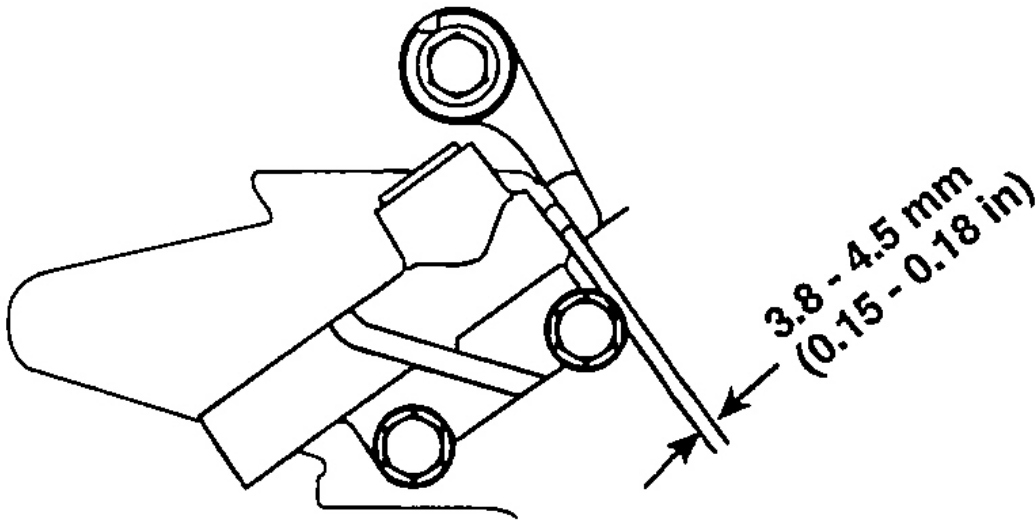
Install Auto Tensioner Set Pin & Tensioner To Oil Pump Case
